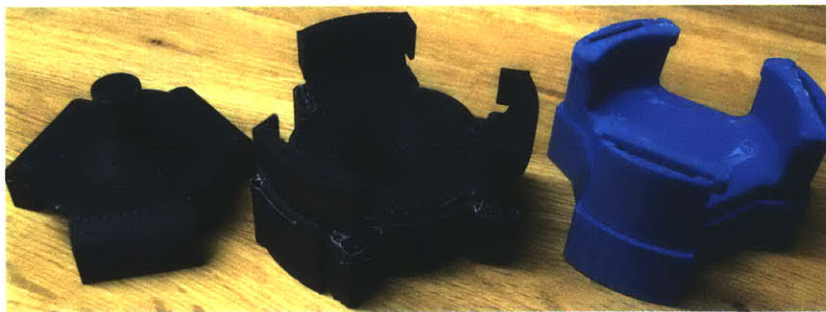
SEAL MOLDS. This figure shows the molds used to produce the seal pieces for either end of RoboClam.
